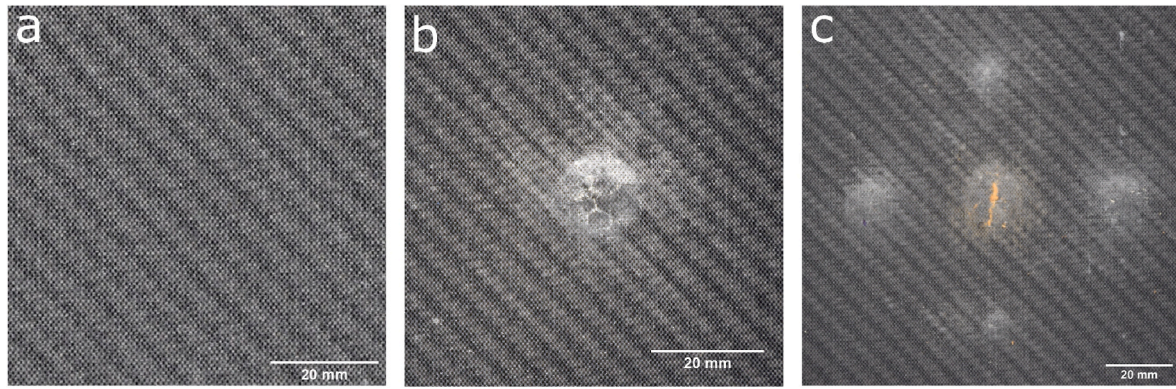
Surface photographs of CFRP samples (a) as received, (b) after the introduction of a single point of damage, and (c) after the introduction of five points of damage plate. These are the matte side of the CFRP samples; the ball bearings used to case the damage acted on the other (gloss) side of the sample.
